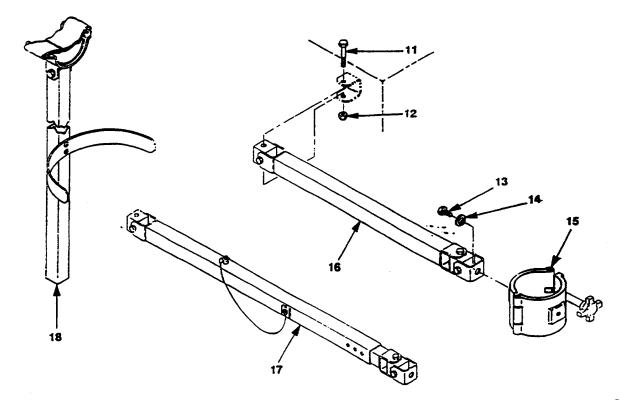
Universal HMMWV Vehicle Mount, MT-6967/G. (Sheet 1 of 2)
